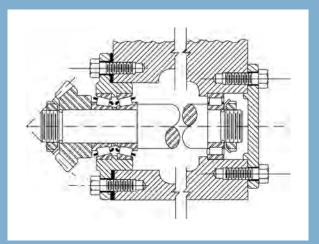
Straddle pinion mounting for short shafts showing use of combined thrust and radial bearings. Gear mounted in oil-tight case.
